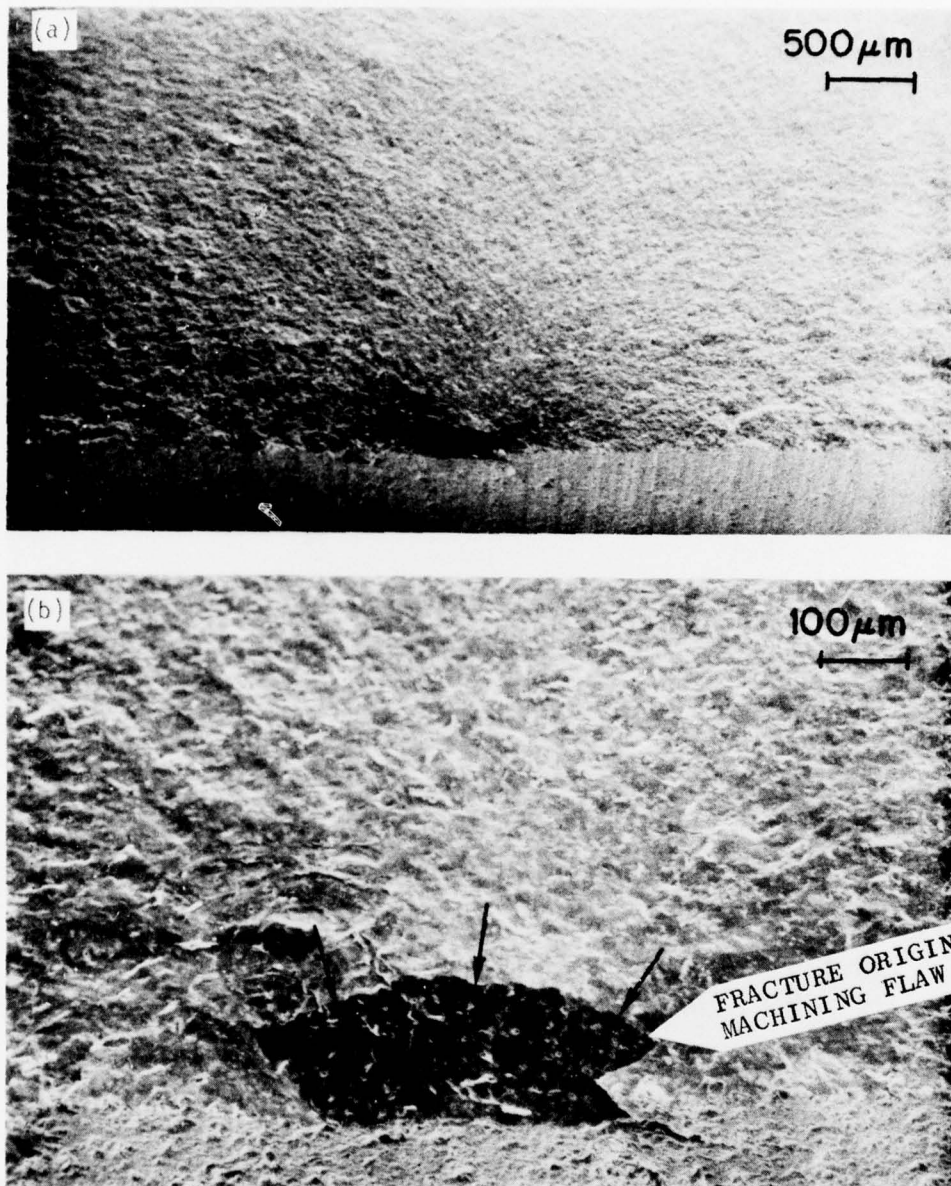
Failure of a larger B<sub>4</sub>C machined test bar. The material and machining are essentially the same as that in Fig. 20, however the specimen was substantially larger having cross-sectional dimensions of approximately .25" x .5" with a proportionate increase in the flexure span length. It failed from a substantially larger machining flaw (arrows in B) and at a substantially lower stress ~ 29,000 psi.
